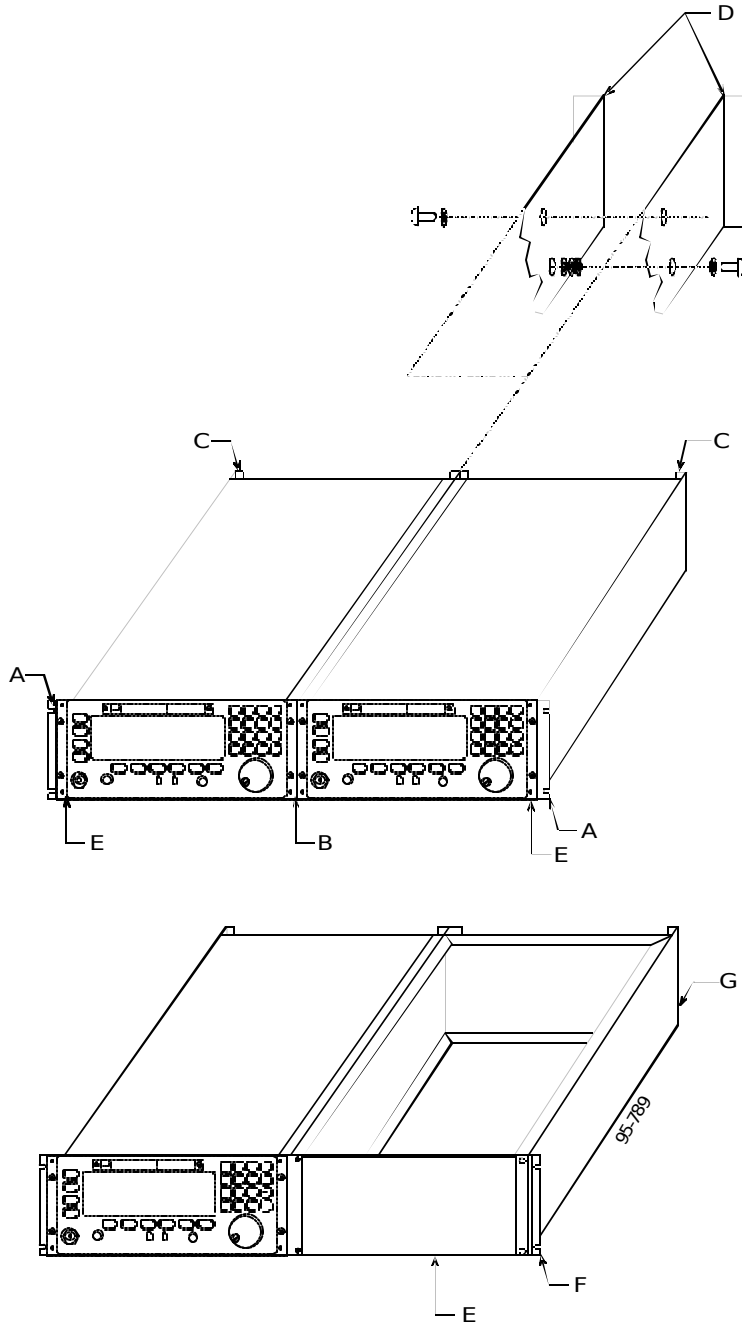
WJ-8700, Configuration of Rack Mounting Accessories
